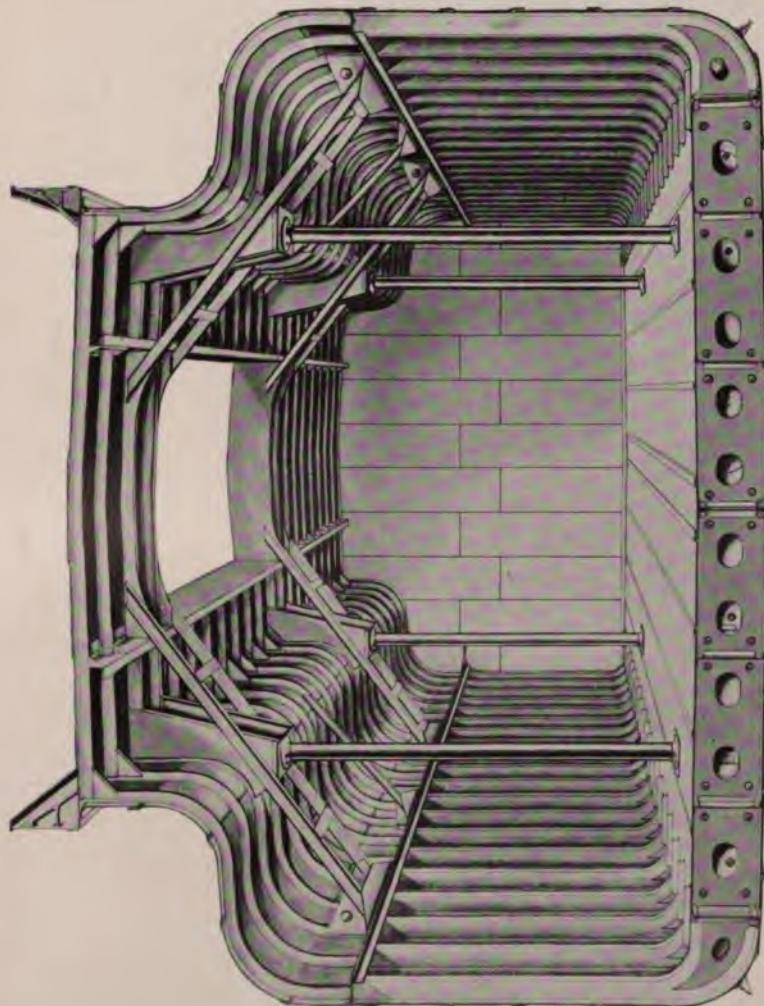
Hold View of Turret Steamer with widely-spaced Steel Tube Pillars, having no Hold Beams, Harbour Deck Beams, or Side Stringers below lower Frame Heads.
